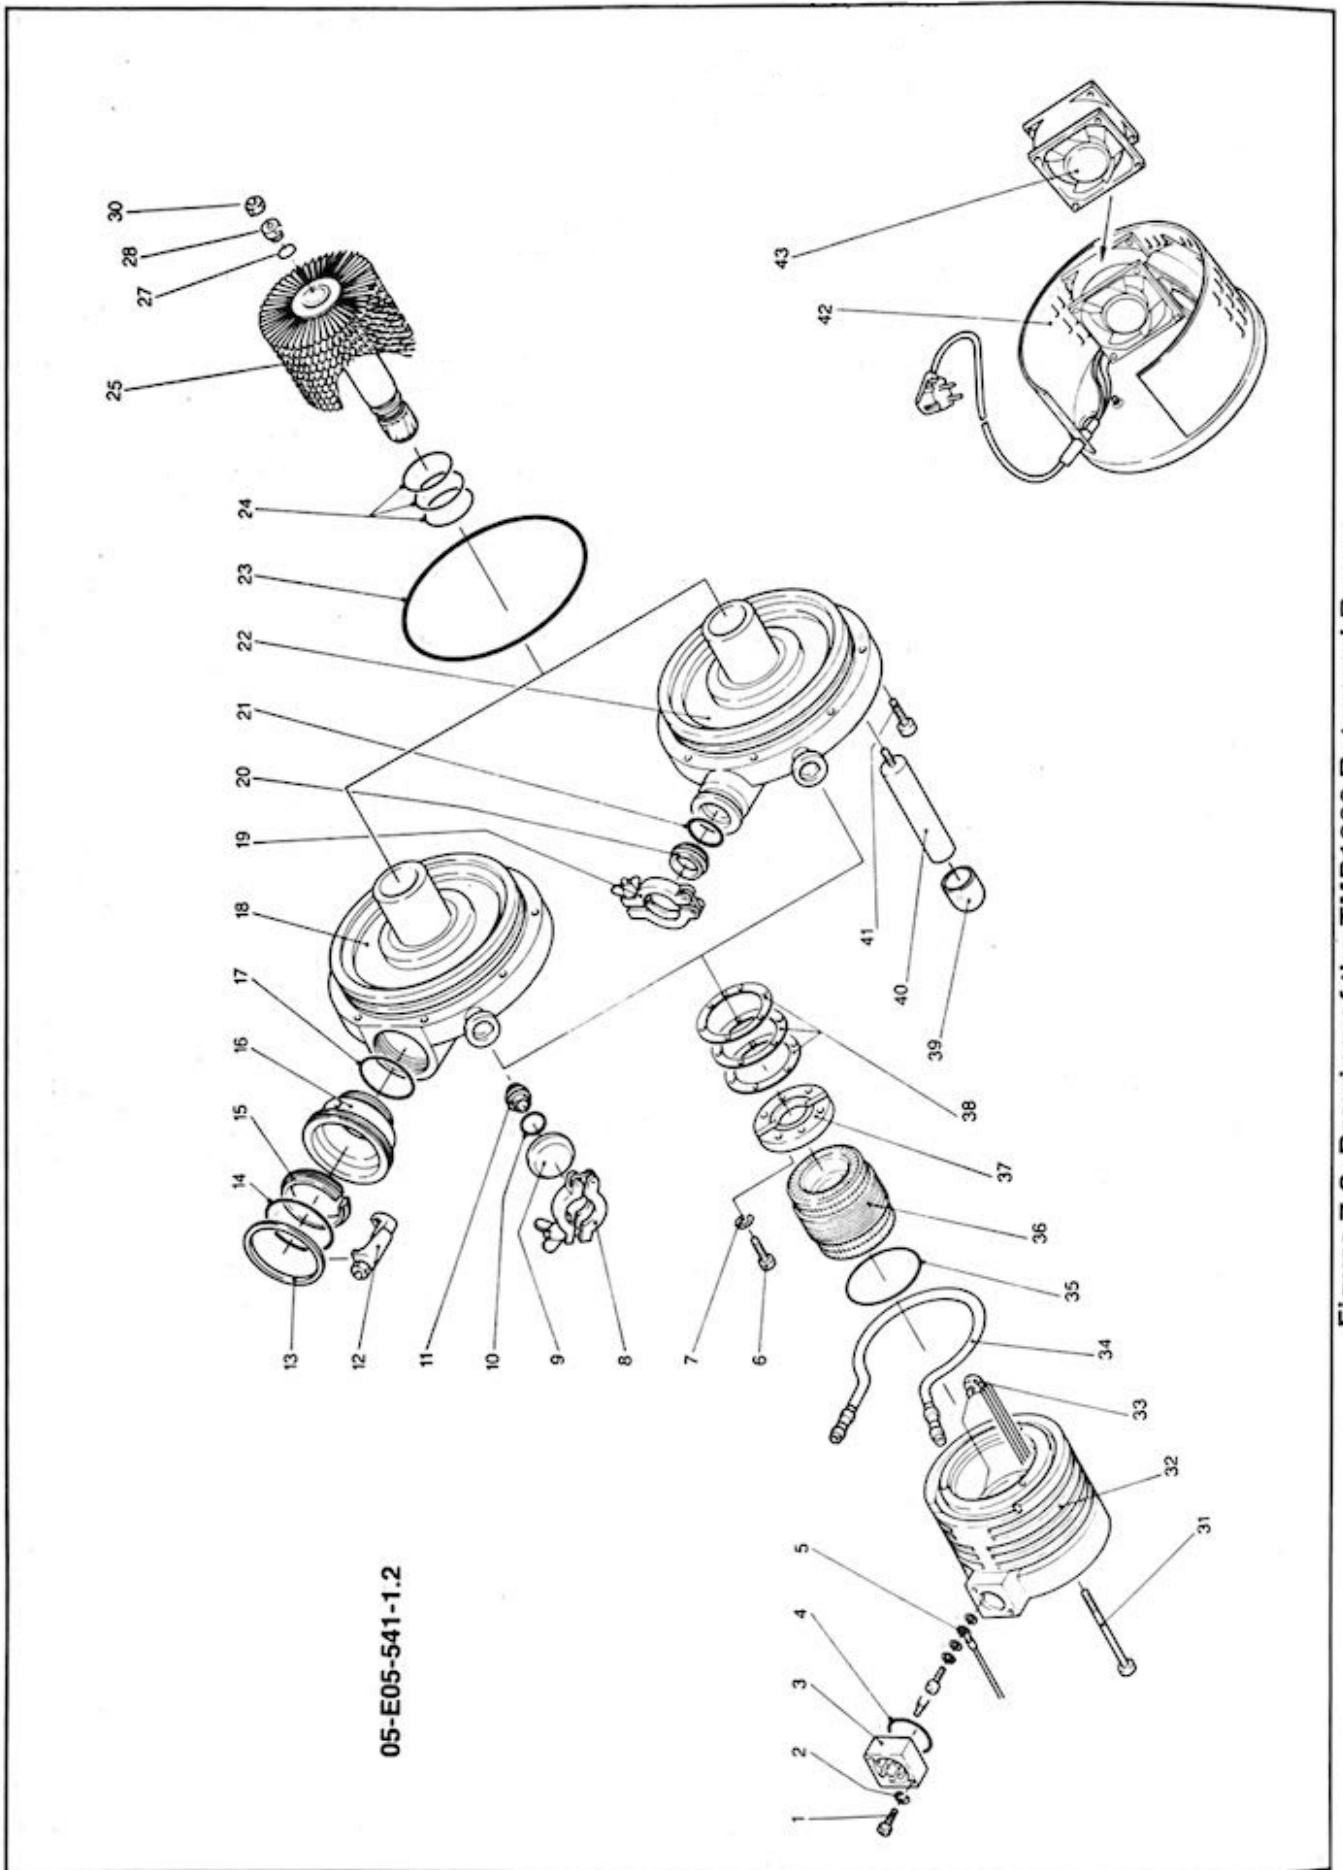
Drawing of the TMP1000 Rotor and Base
